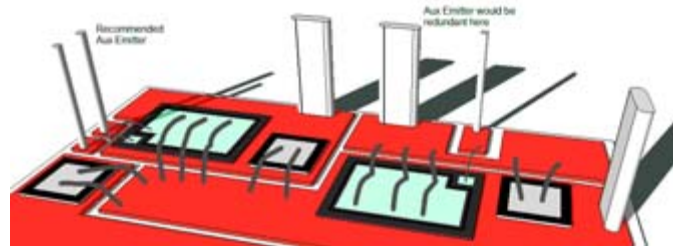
Example of a DCB layout with, and without, auxiliary emitter terminal
